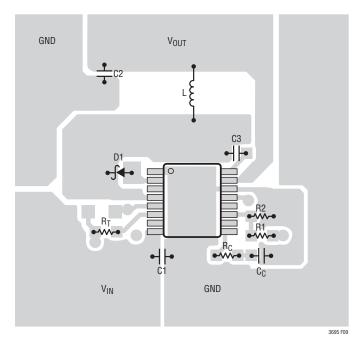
A Good PCB Layout Ensures Proper, Low EMI Operation
